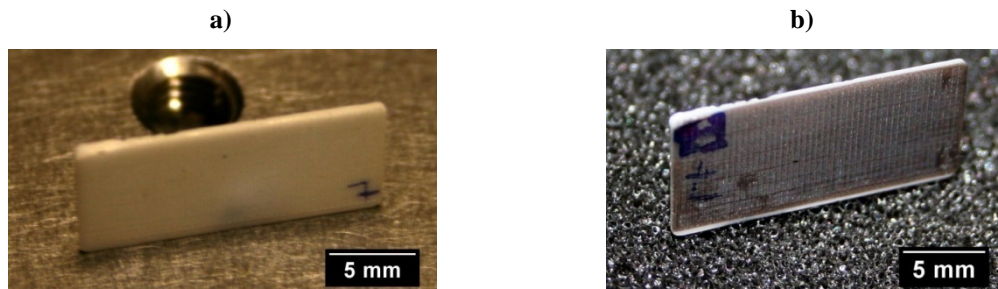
The images of 600 µm thick 3Y-TZP sample: a) before; b) after laser machining.
